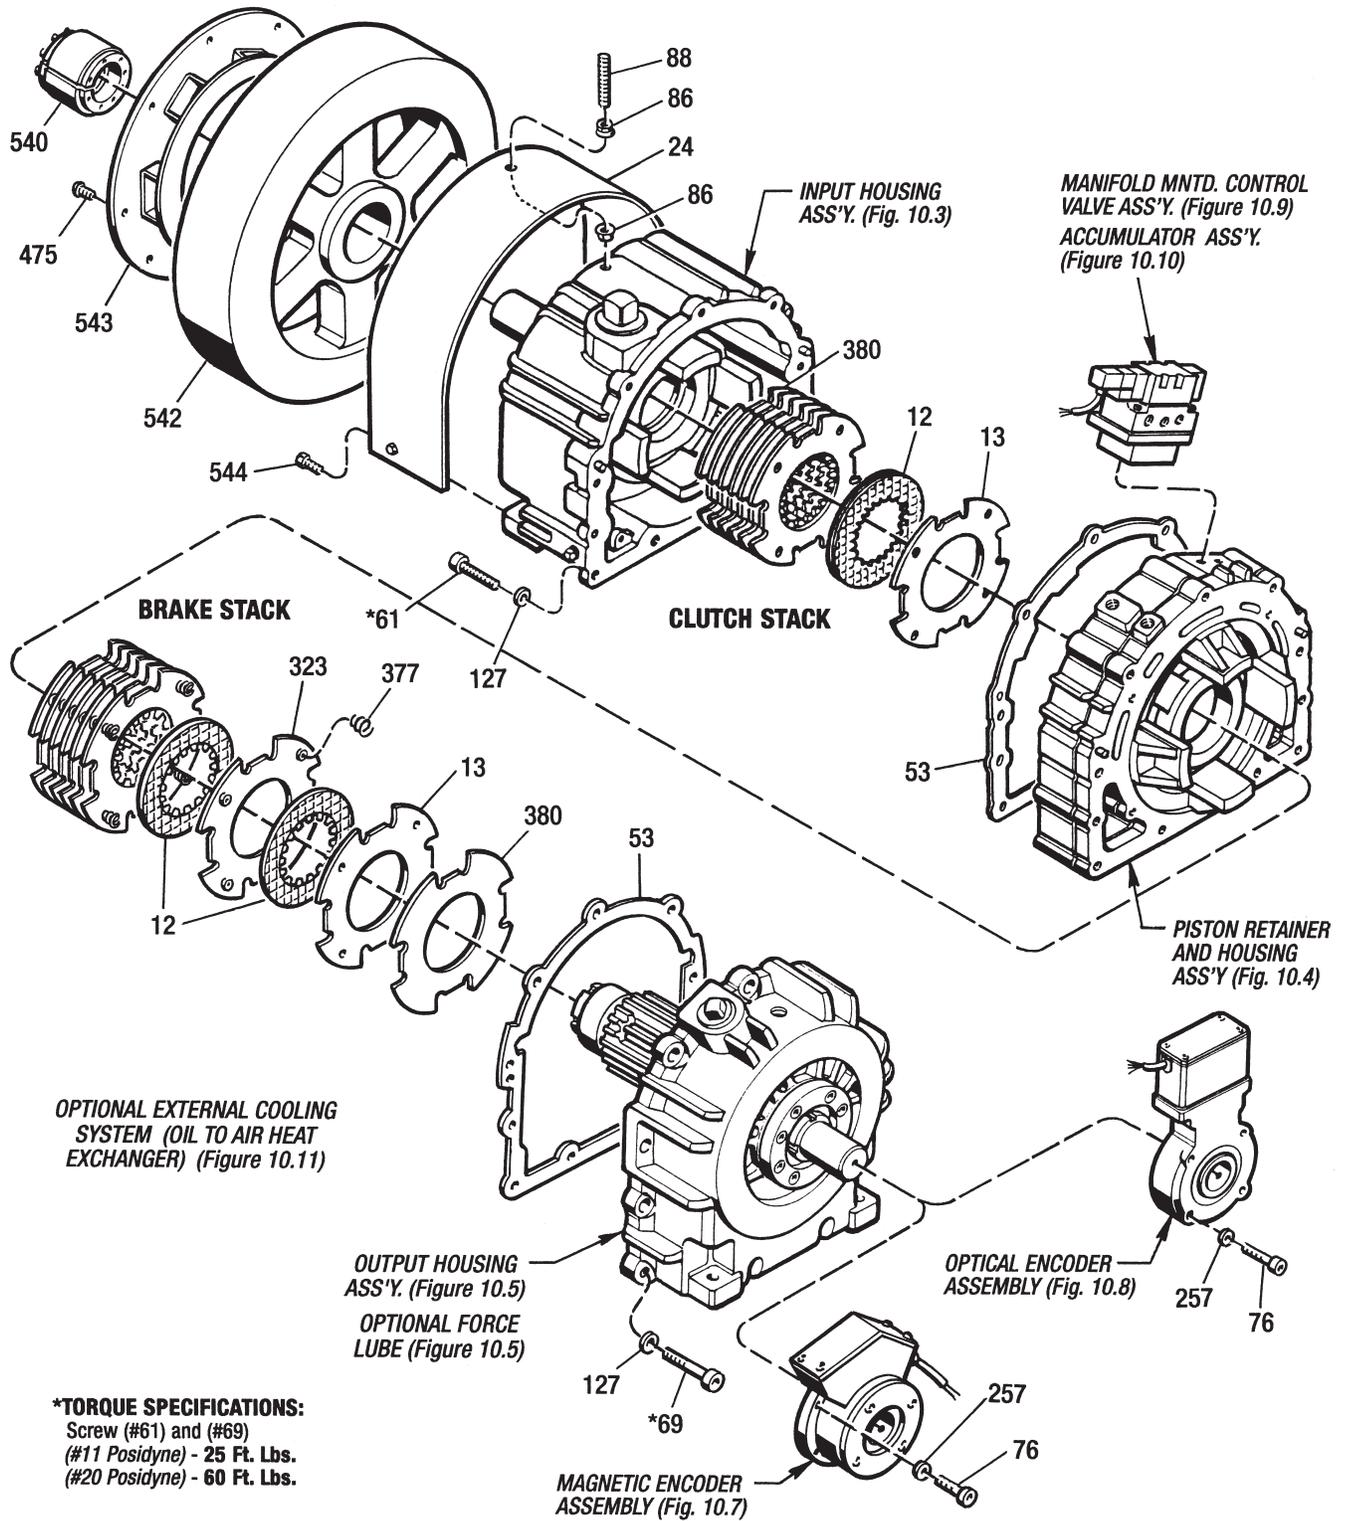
#11 and #20 Posidyne Indexing Drive (Without Planetary Gear Reducer)
